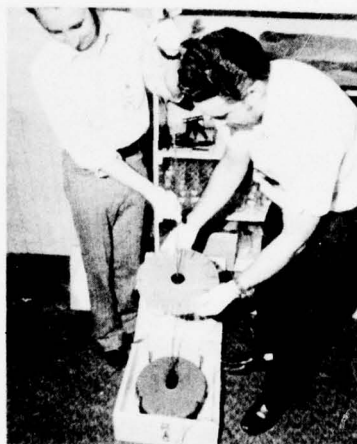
Assembly of the Large Stack Laminates, the End Plates, and the Bonding Fixture in the Shipping Crate.
